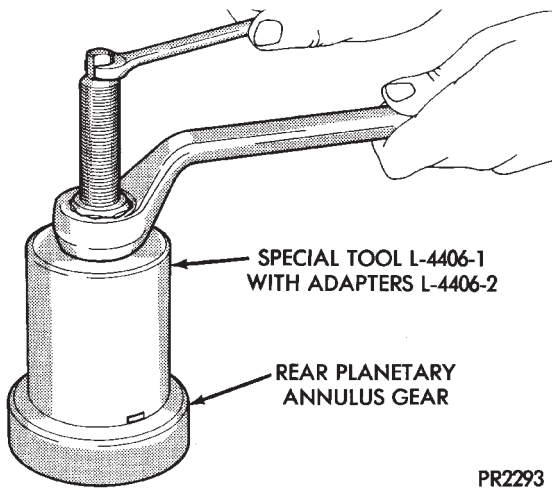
Remove Rear Planetary Annulus Gear Bearing Cone
